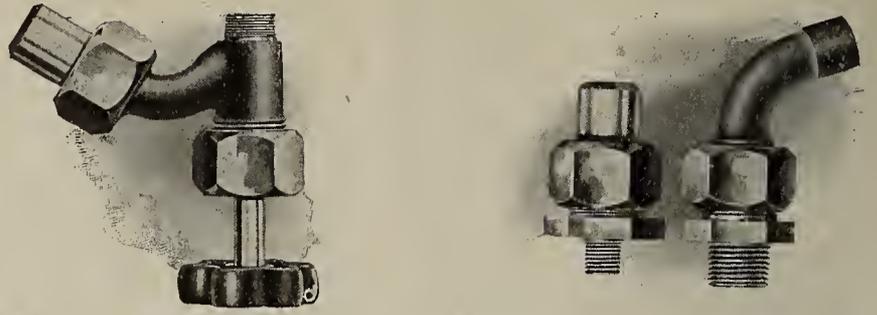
EMERGENCY VALVE AT LEFT, AND FIG. 4—CHECK VALVE CONNECTION.
